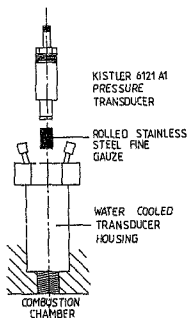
Water cooled transducer housing - disassembled and assembled into cylinder head with transducer
